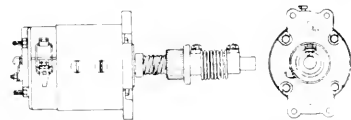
ANOTHER TYPE OF FLANGE MOUNTING
